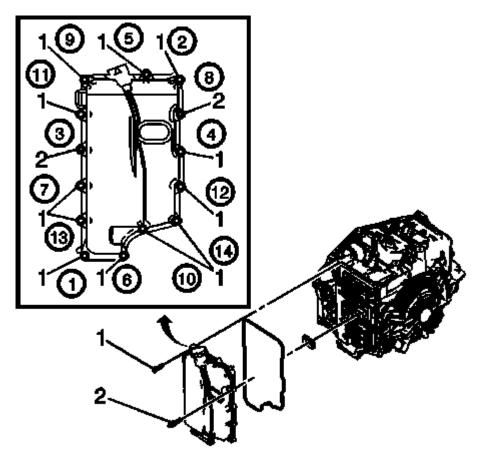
Identifying Control Valve Body Cover Studs & Bolts Courtesy of GENERAL MOTORS COMPANY
